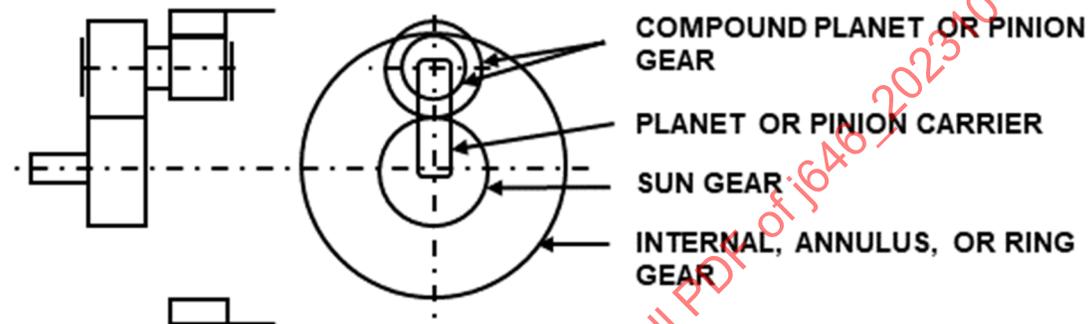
Compound internal planetary arrangement, single sun, single ring, stepped planet
